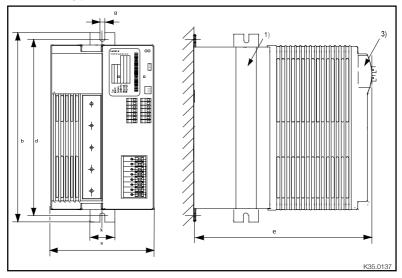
Dimensions 8215 - 8218: Standard assembly
